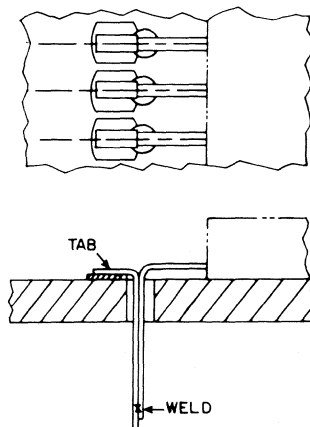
Tab welding method for RCA flat packs.
